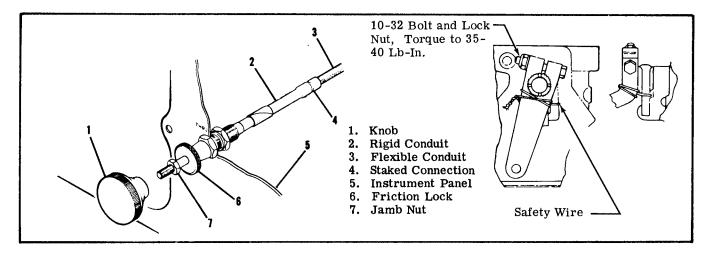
Throttle Control and Throttle Arm to Idle Stop Attachment
